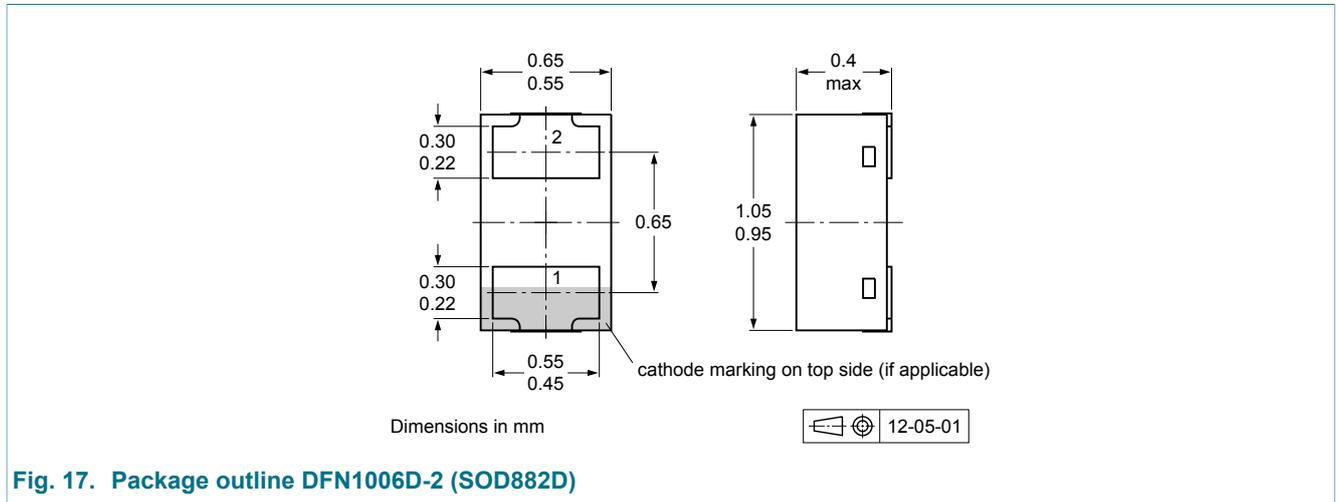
Package outline DFN1006D-2 (SOD882D)
